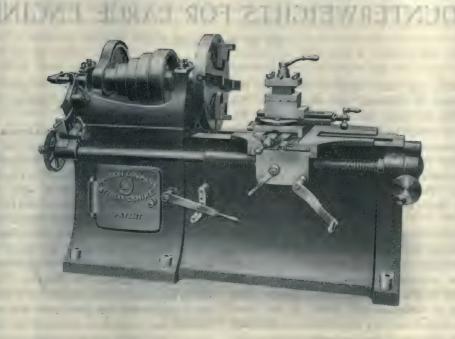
FIG. I. THE MACHINE AS A SURFACING LATHE; THE SPINDLE IS CHANGED FROM BELT TO GEAR DRIVE
